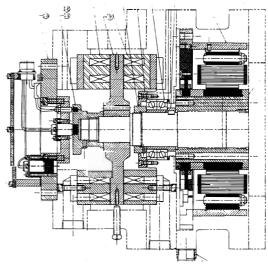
Radial and axial magnetic bearings on non-drive end of pump.
